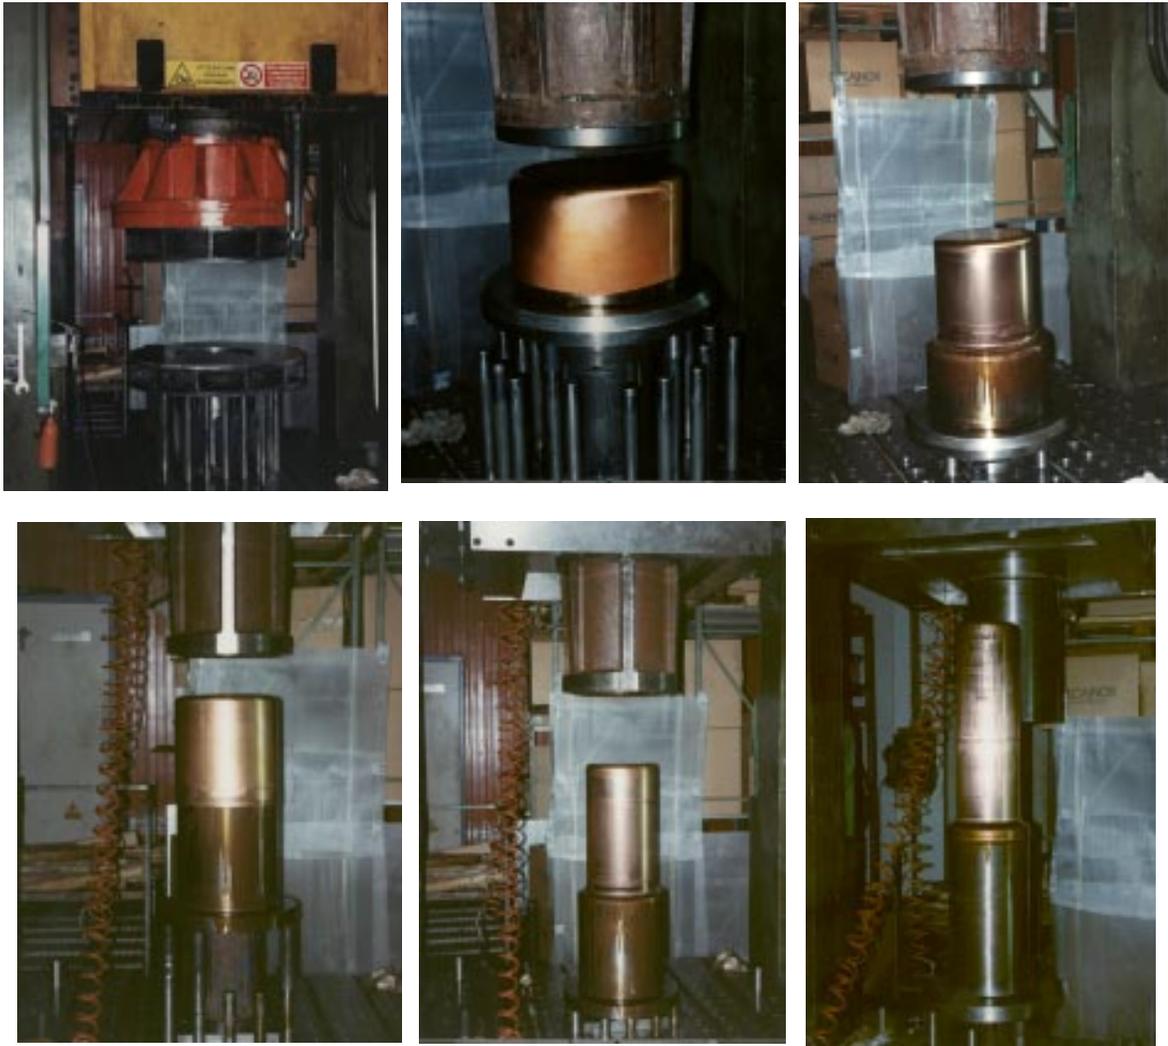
First drawing and redrawing of the seamless copper tubes under investigation at LNL.
